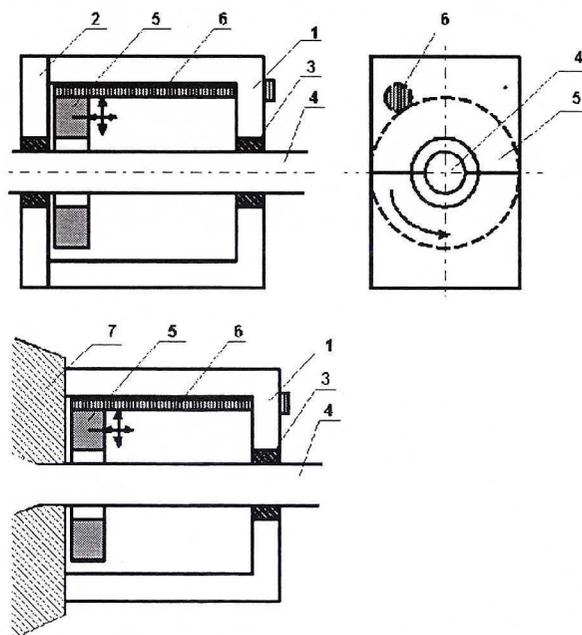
New instrument for inspecting rope ends in tapered sockets
